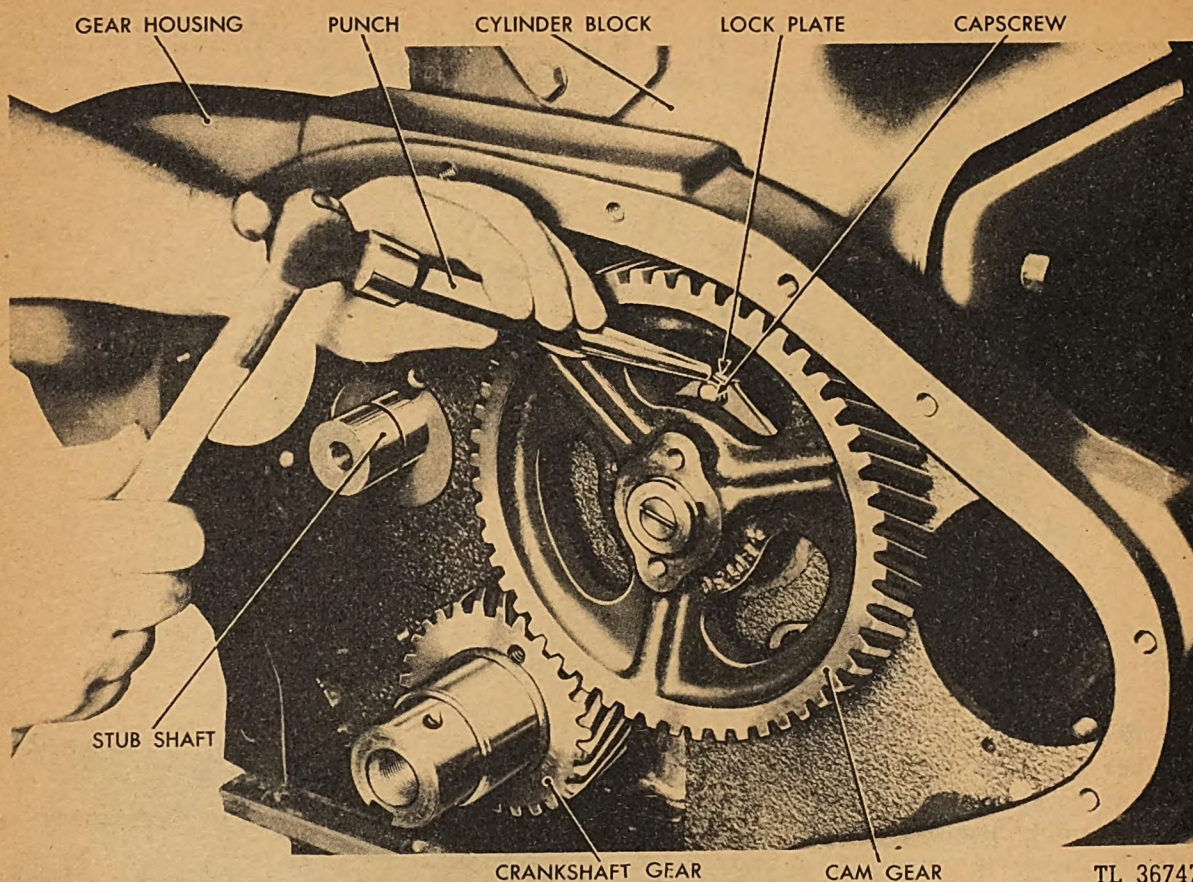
Straightening Tabs on Cam Retaining Lock Plate
